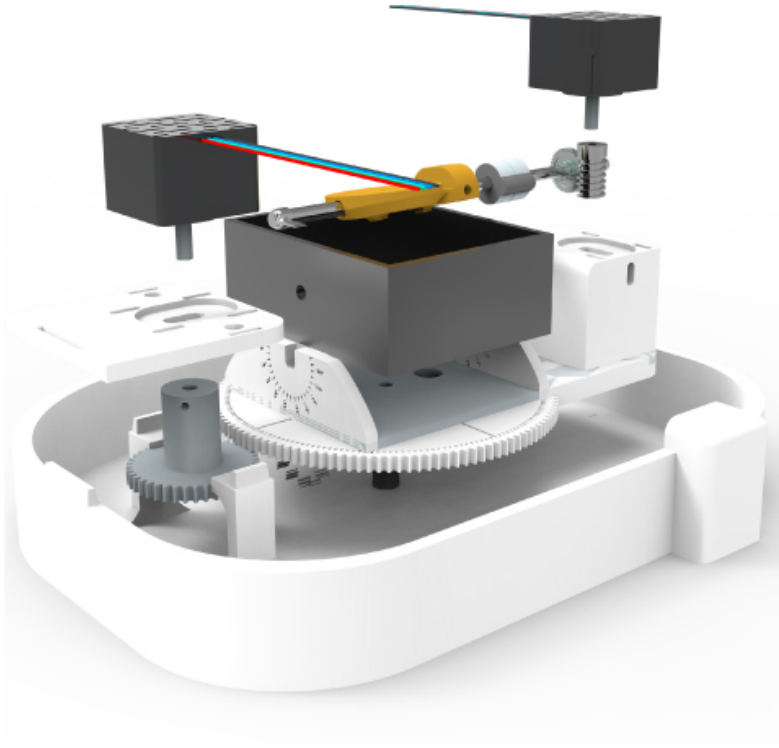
3D model disassembled where is possible to visualize the different gears and platforms of the device.
